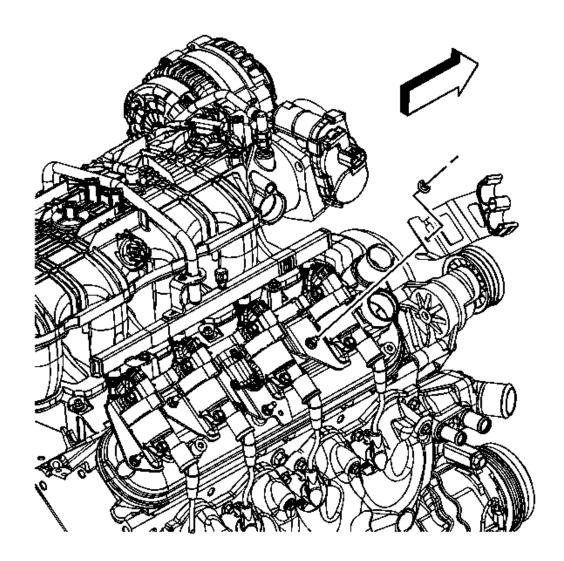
View Of Heater Hose Bracket & Nut Courtesy of GENERAL MOTORS CORP.
